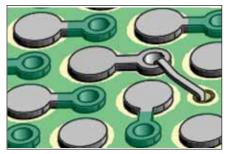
Insert a copper foil jumper into the plated hole and Teflon sleeve.
